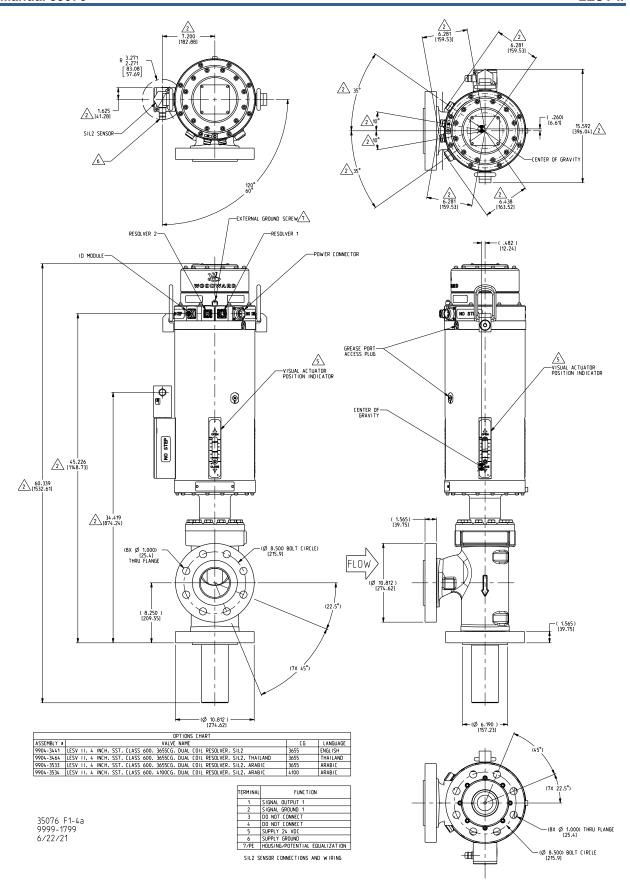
Outline Drawing (4-Inch LESV II Class 600)
